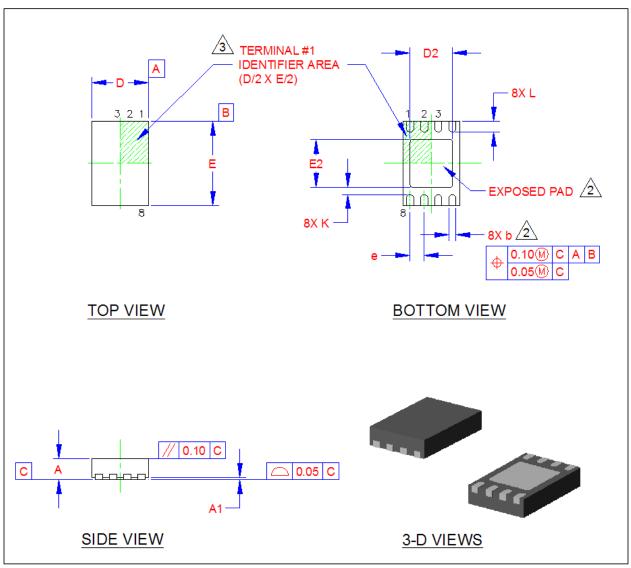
2mm x 3mm TDFN-8 Package Drawing
